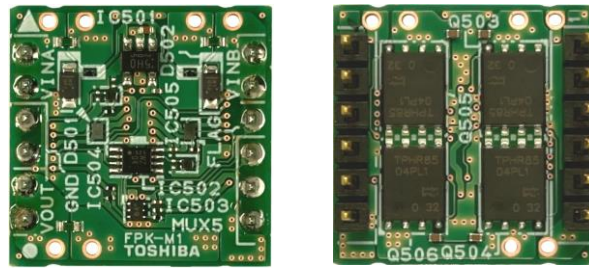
External View of Module Board MUX5 (Front Side, Back Side)
